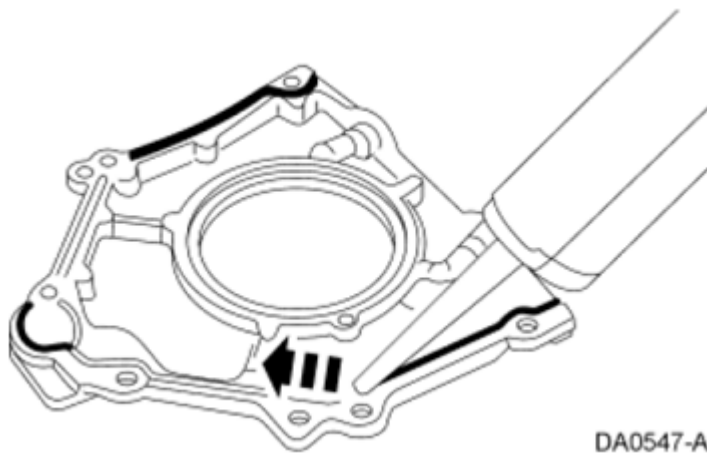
Applying Bead Of Crankshaft Rear Seal Retainer Plate
